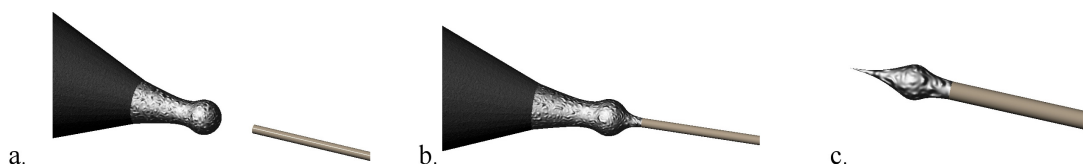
Schematic of the coating process of a Ni electrode wire with pure In.* First, the In is made molten on the tip of a welding machine and the Ni wire is brought close (a). The wire is then immersed in the formed droplet of In (b). With a slow movement the Ni wire is withdrawn from the droplet (c). Upon cooling and due to the slow withdrawing process on the end of the Ni wire, a sharp conical In coating is shaped.
